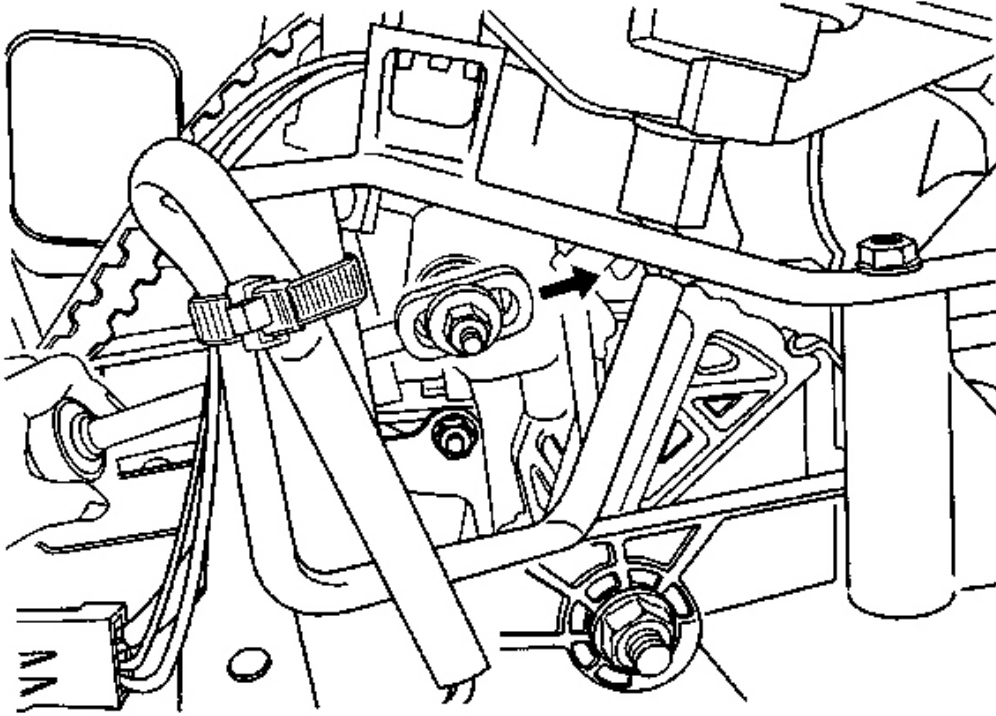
Shift Control Cable & Control Cable Adjusting Nut
